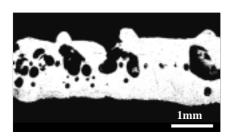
Longitudinal cross section of lap joint of GA steel sheet welded by laser beam
